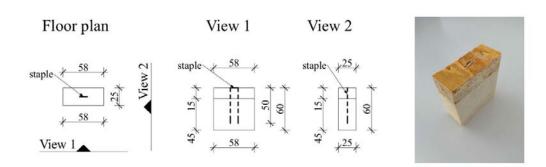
Dimensions and arrangement of the test specimen for performing the staple joint to pull out the staple.
